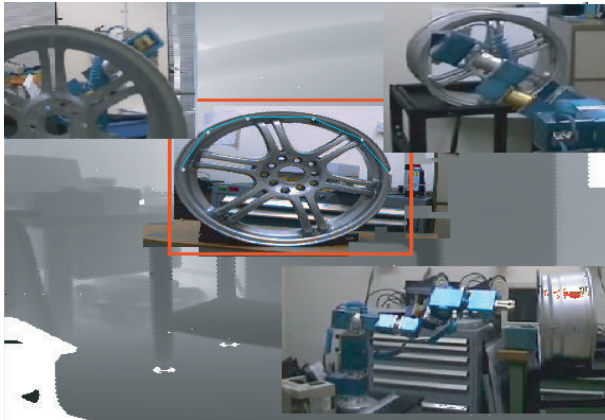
Sensor fusion applied to intuitive robot programming. The operator has created 5 teaching points on the user interface screen. The robot is able to 'played back' path taught by the operator without hitting the workpiece.
